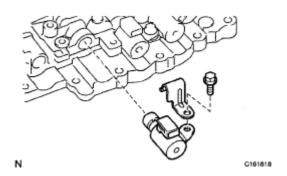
Identifying Shift Solenoid Valve And Valve Body Wire Harness Clamp With Bolt
